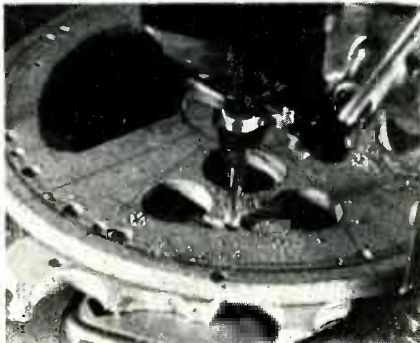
A SERIES OF SMALL HOLES can be drilled to rough-cut bulkheads to shape.
